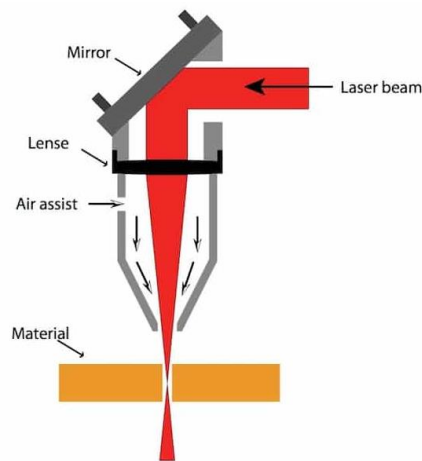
CO₂ laser cutting process (MachineMfg, 2018)
